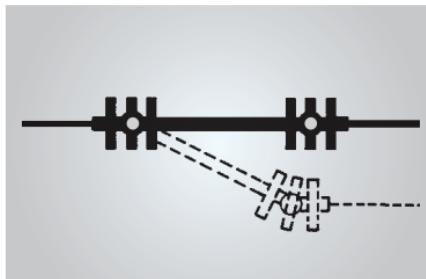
Lateral expansion joint, flexible on all planes. Deflection transversal to anchor plane
